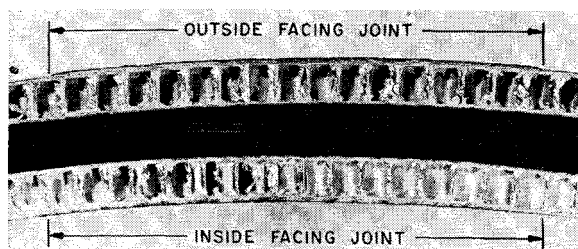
Cross-sectional pieces of cylinder sandwich showing laminated facing joints.
